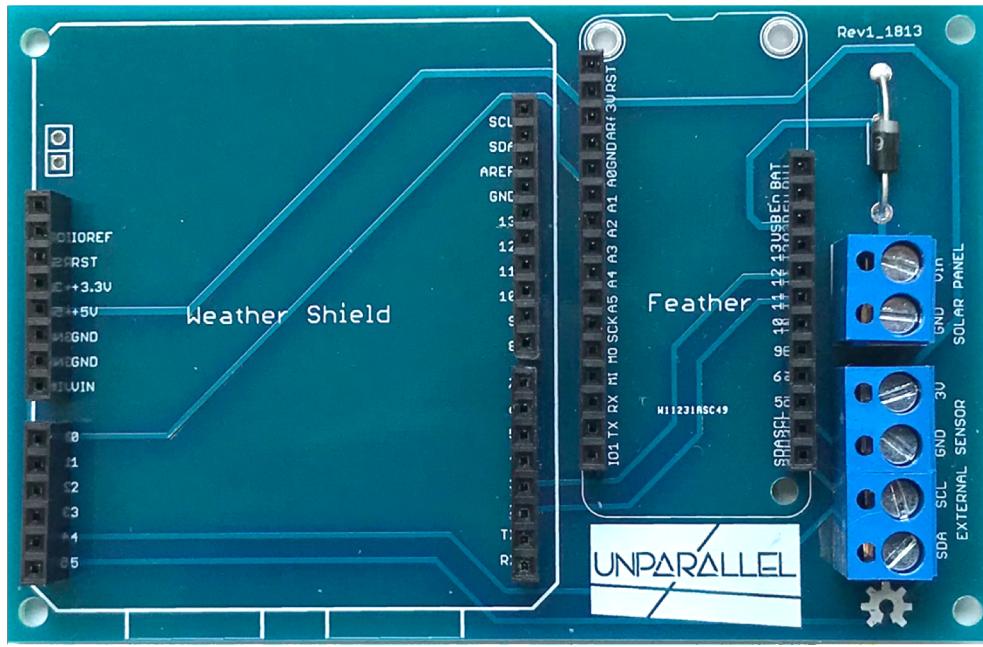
Female header pins, DG300-5.0 connectors and diode in PCB
